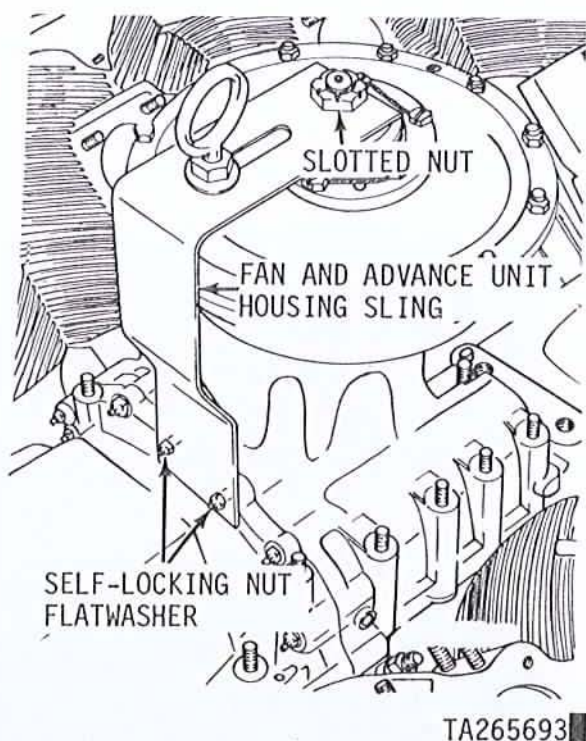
Removing or installing rear fan drive housing using fan and advance unit housing lifting sling.
